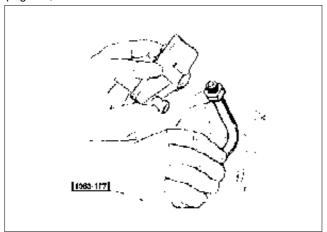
Fit the breather unit pipe providing oil return to engine into the cylinder block;
